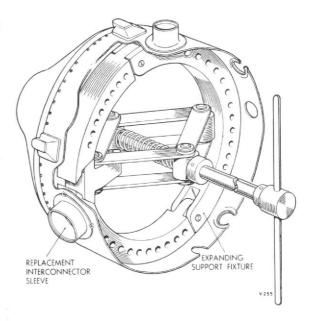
Method of providing support inside the flame tube when welding the interconnector sleeve in position.
